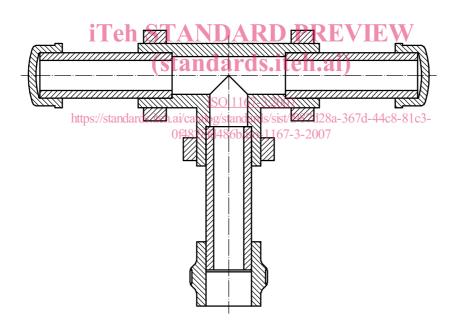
Example of pressure-tight test piece with hydrostatic end thrust
